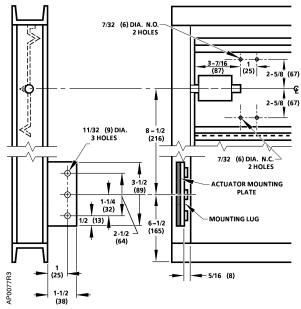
Frame Mounting-Type B Dimensions. Dimensions in Inches (Millimeters).
